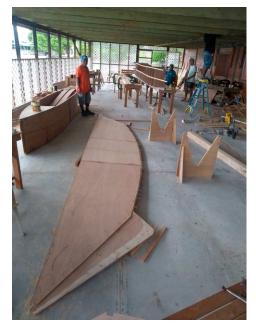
Assembling process of the side panels: Keel, bow and skeg are clamped in between the side panels
